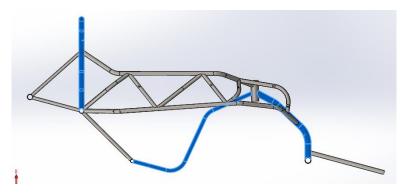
Side view of frame. All .049" tubes are shown in blue, and all .035" tubes shown in grey.
